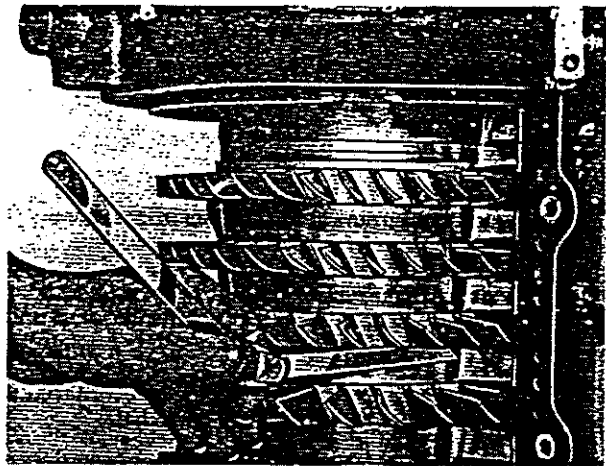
Checking Clearance Between Compressor Vane and Spacer
